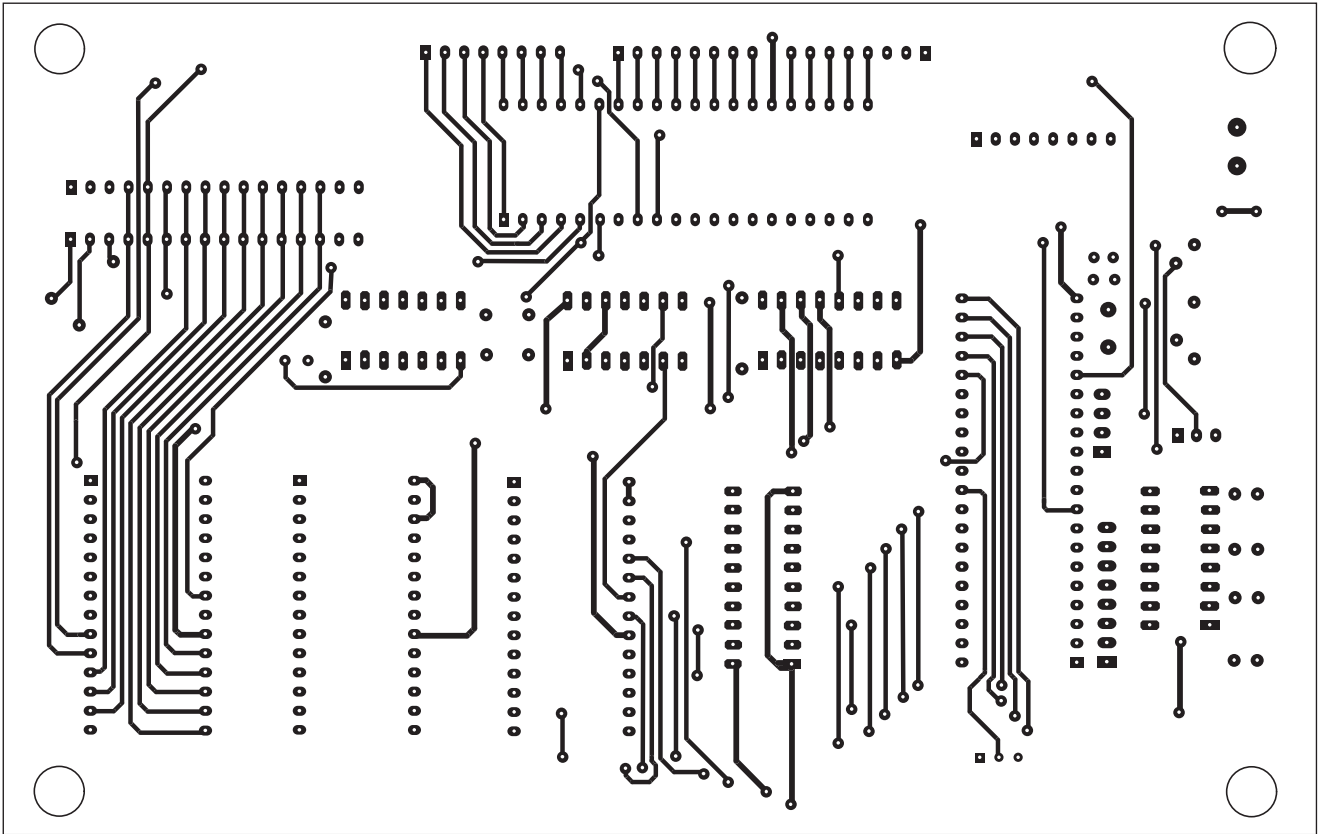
Actual-size, component-side PCB layout for the 89C51 development board
